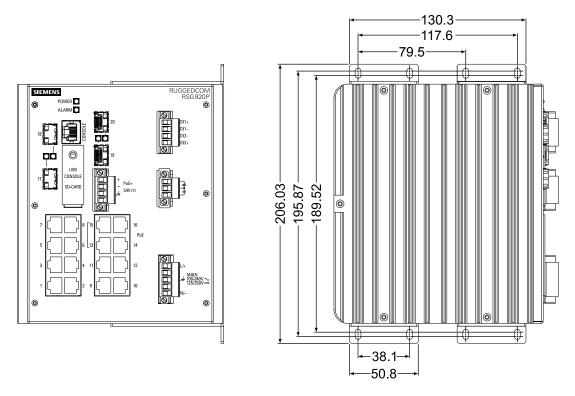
Panel Mount Dimensions (Side Mount Shown)
